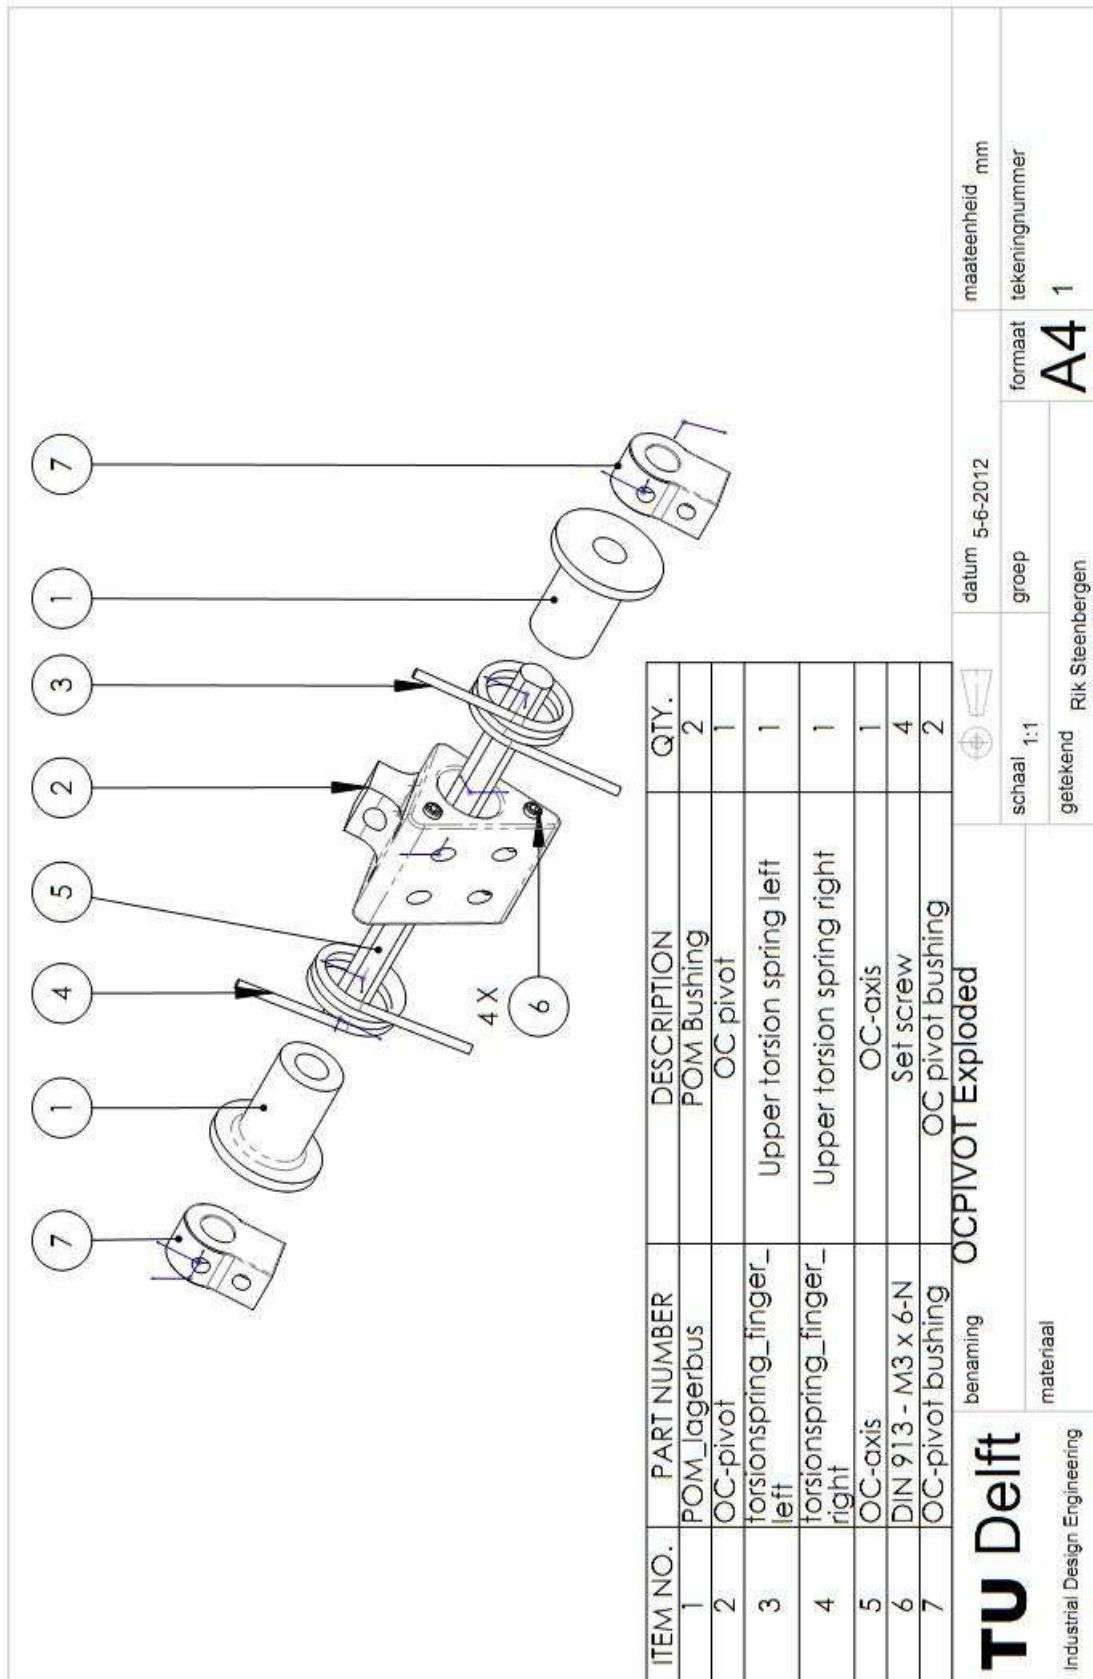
Exploded view of the upper pivot; OC. It has five different components: two OC pivot bushings, two POM bushings, upper torsion springs, T1 pivot, and the OC axis (rotation axis)
